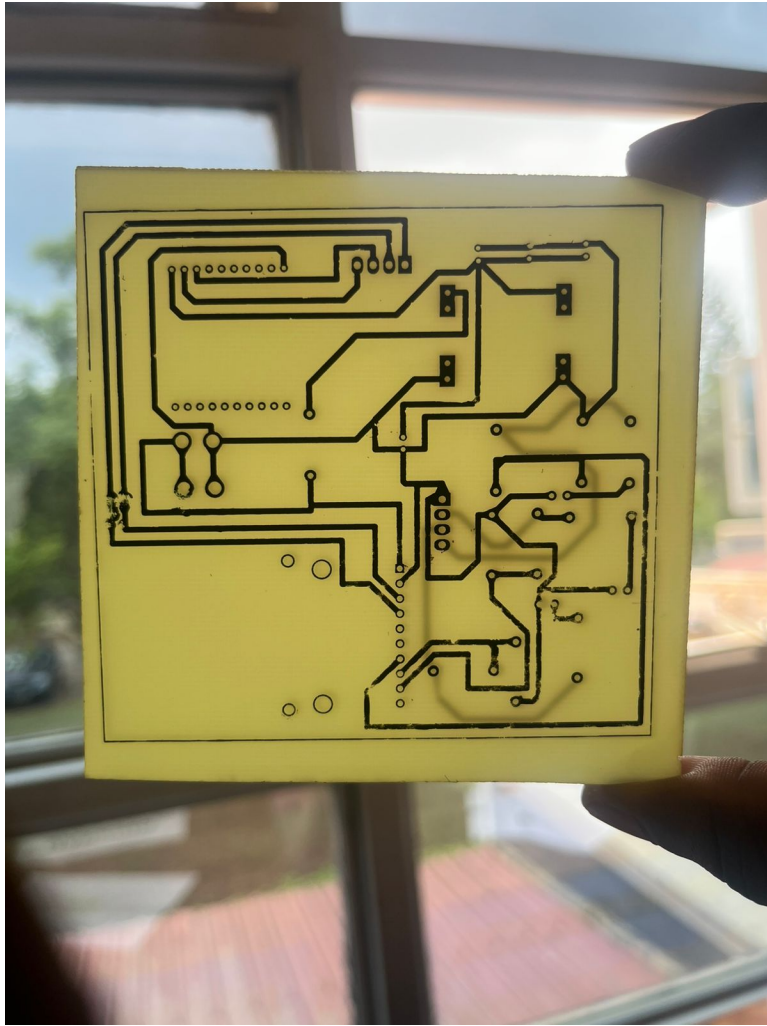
Flight-computer PCB after chemical etching (bare board, pre-assembly). Authors' own fabrication.
